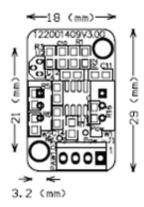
Paw Pressure Sensor Board, Top View
